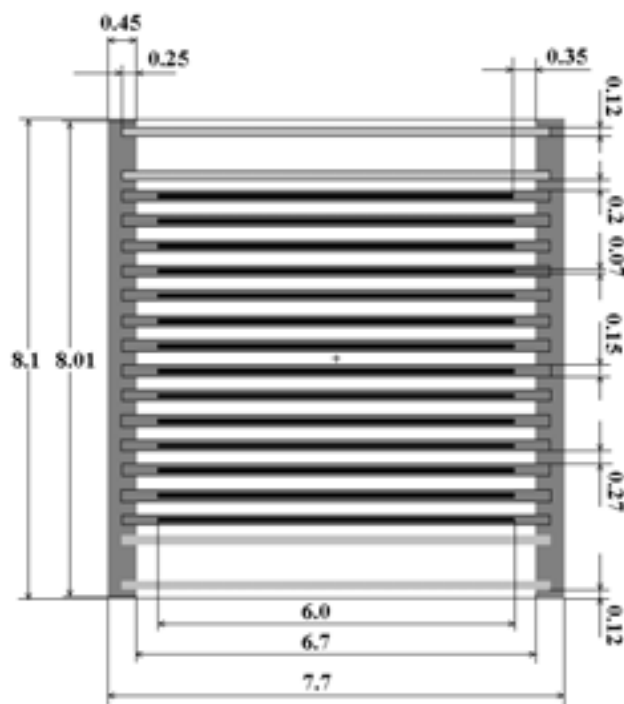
RA-3 control fuel assembly Dimensions are in cm.
